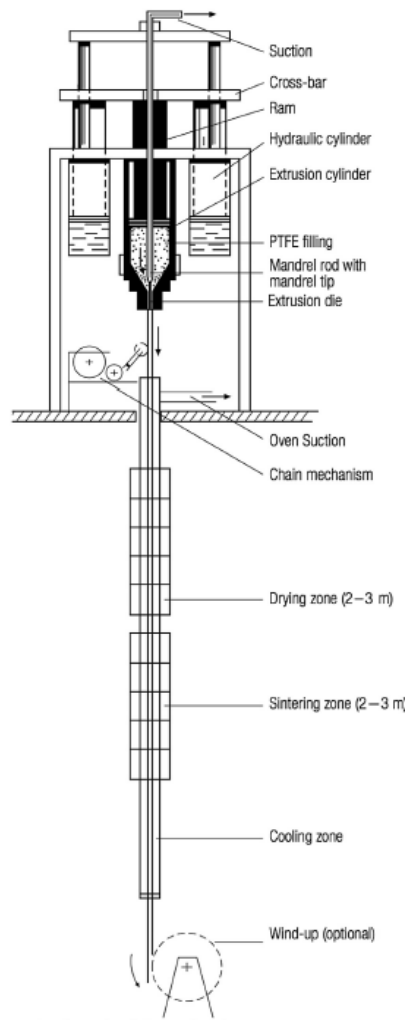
Hydraulic paste extruder for tube fabrication<sup>5</sup>
